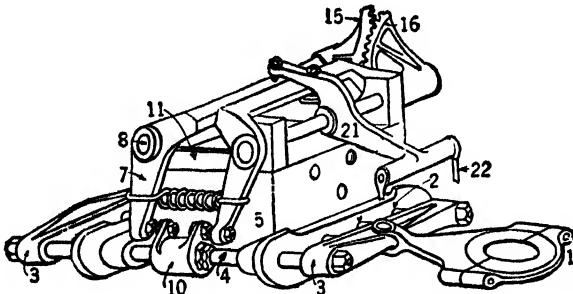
Perspective view of pump used on large Busch-Sulzer engine.
